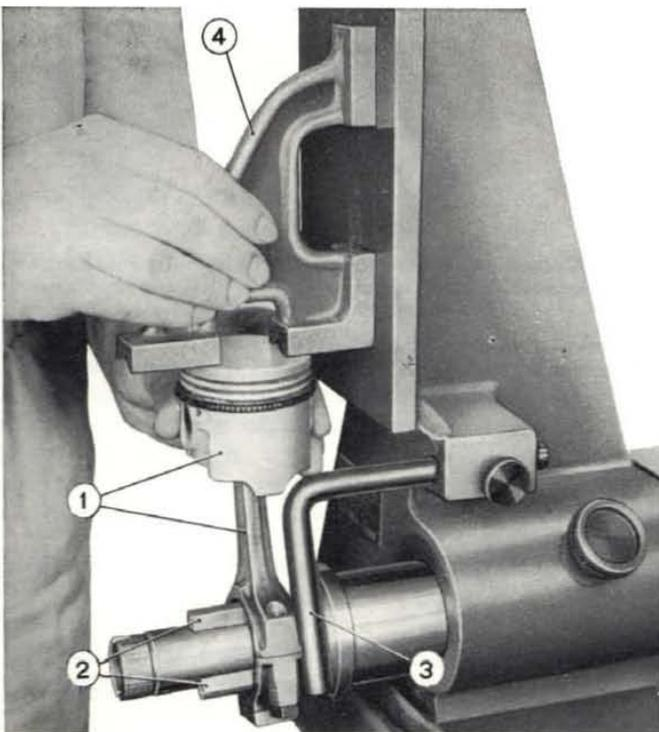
Checking connecting rod-piston and pin assembly for misalignment.
